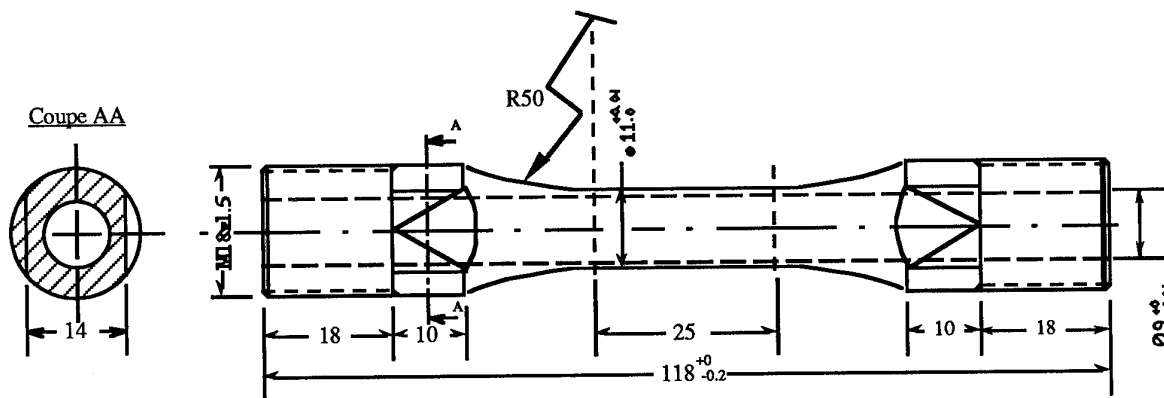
Tubular thermo-mechanical specimen (all dimensions in mm).
